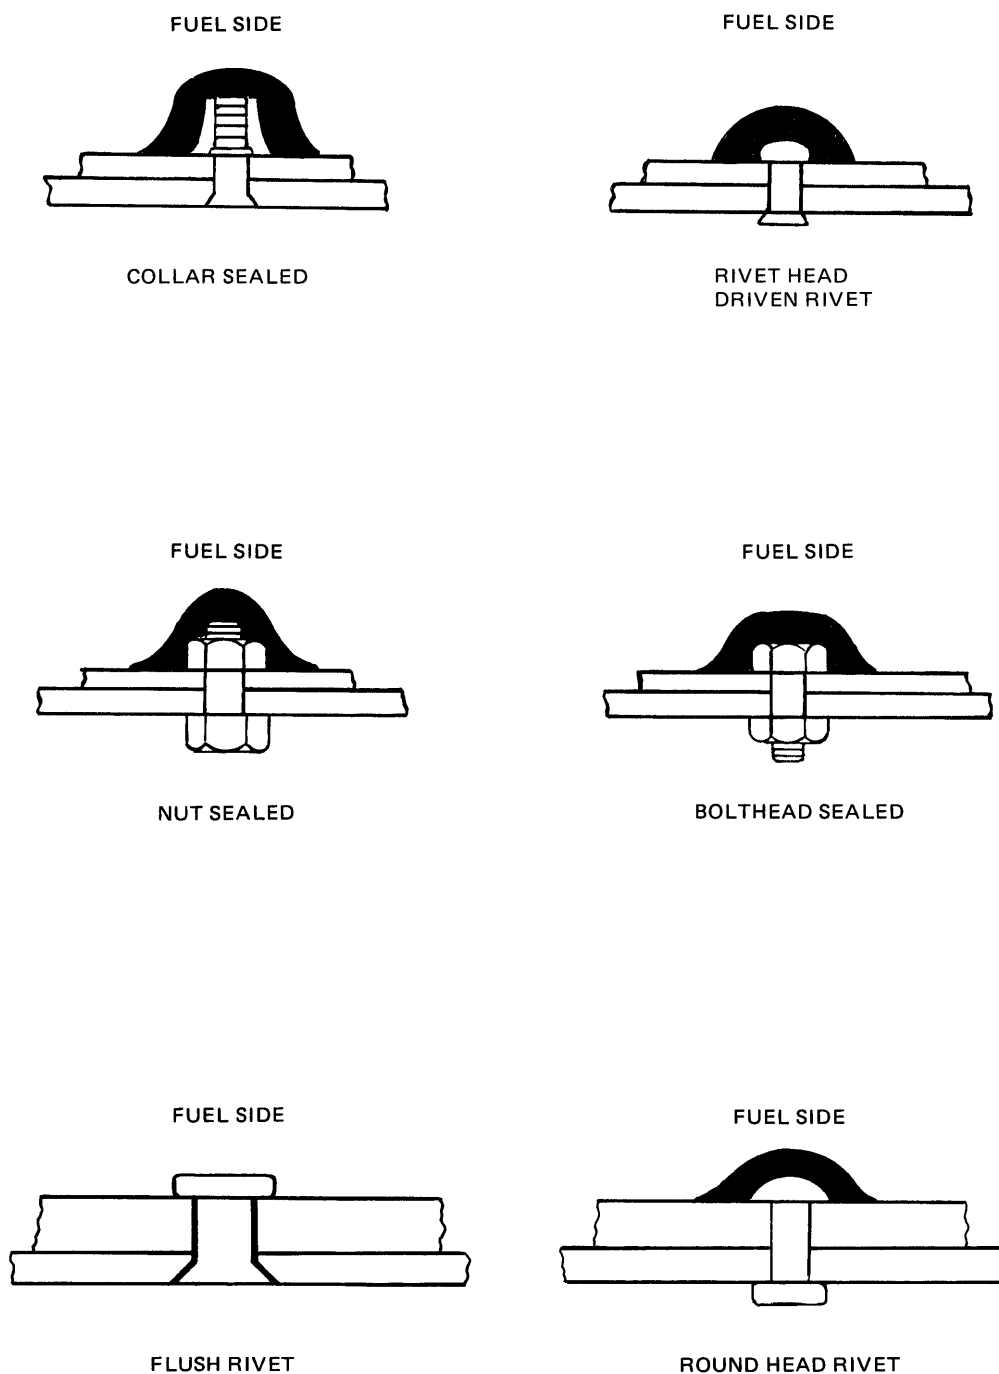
Typical Fasteners, Overcoat and Fillet
